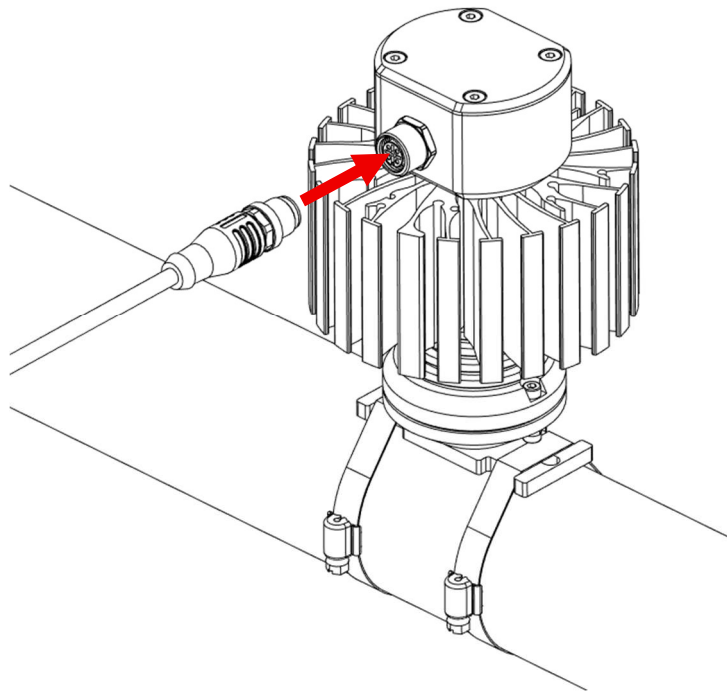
Power supply (Thermoelectric generator module – Tube mounting) connection
